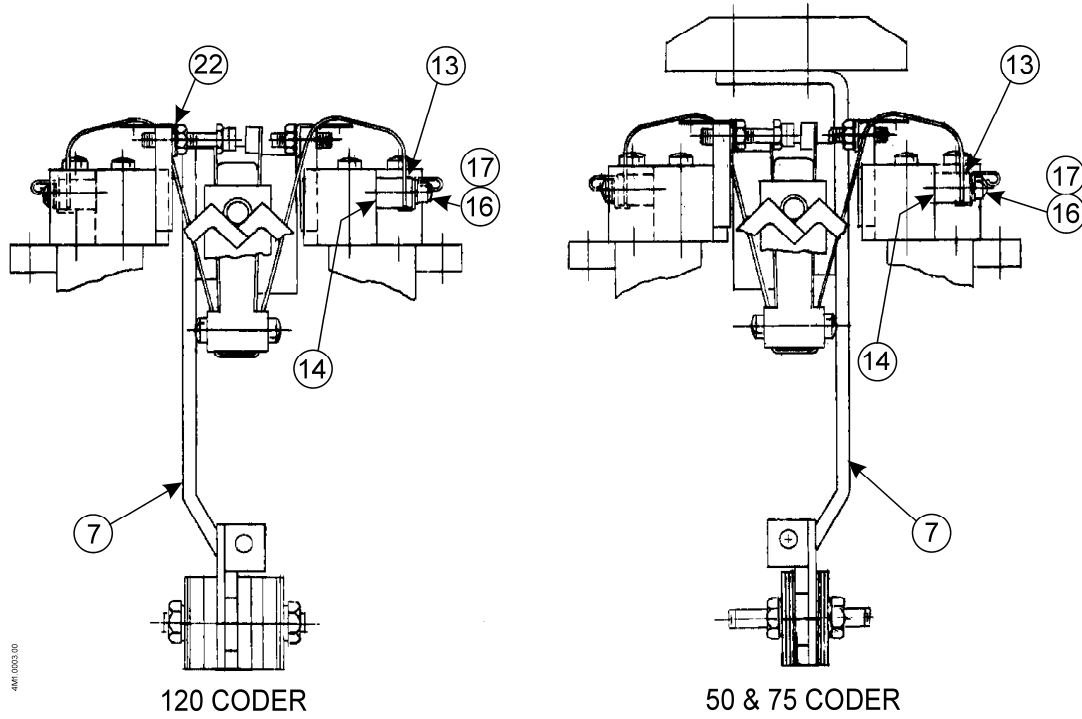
PC-250TR Relay Operating Unit Assembly, Sheet 1
